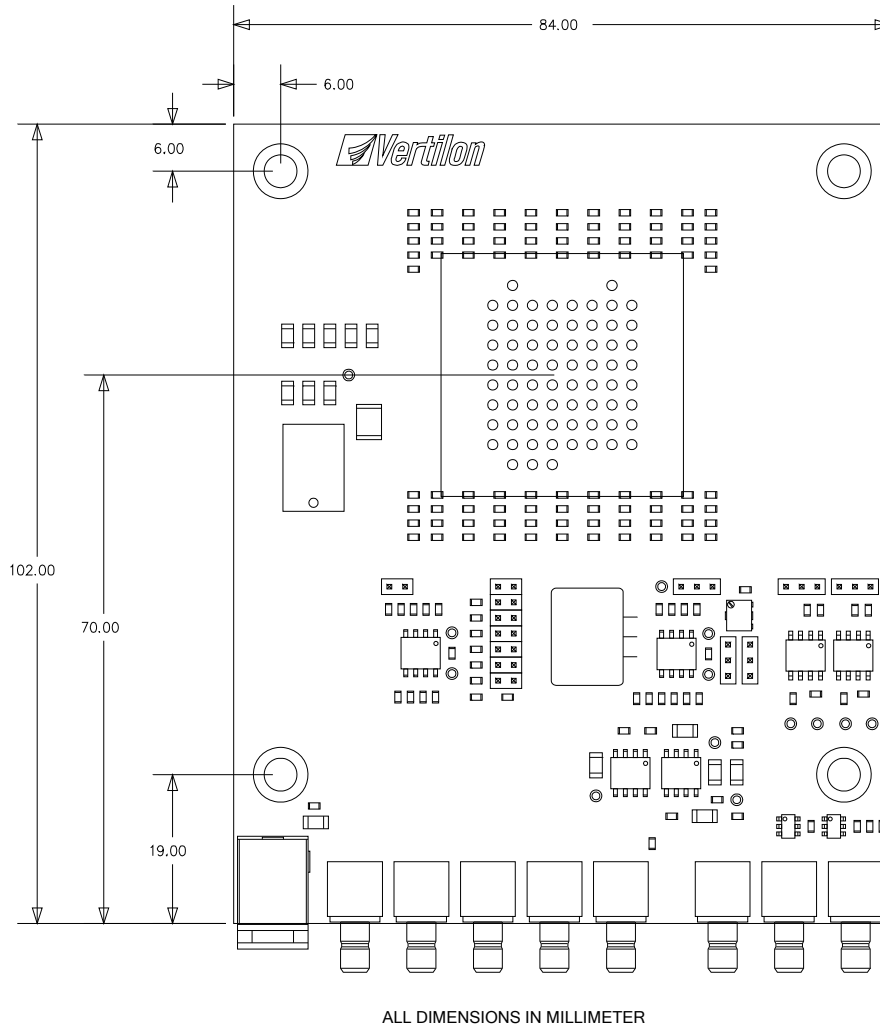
SIB164-1018 Printed Circuit Board Dimensions
